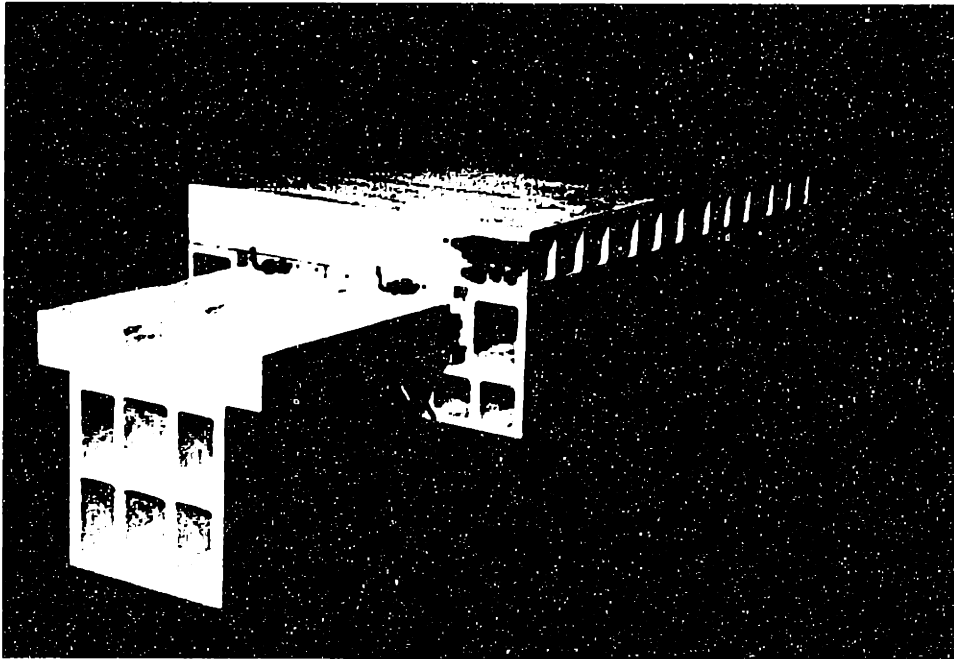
Photograph of the prototype ceramic machine tool axis¹. The axis was mounted to an isolated granite table for measurement purposes. Hydraulic supply lines are not shown in this photograph
